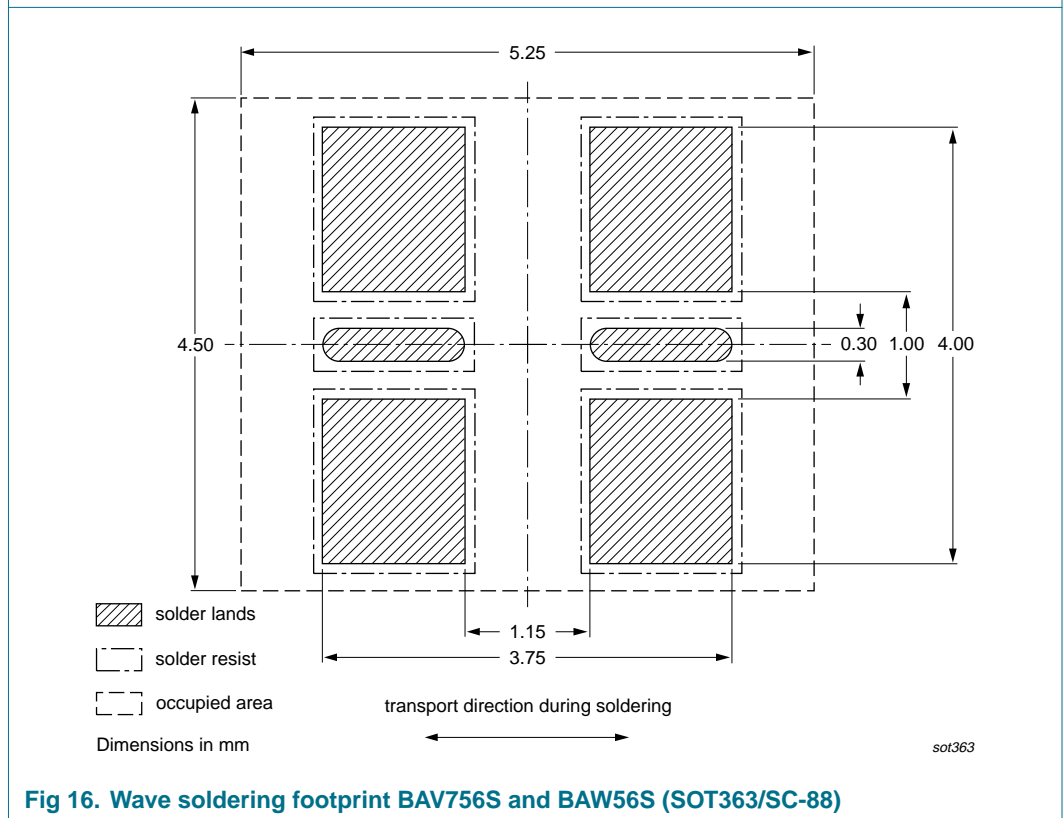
Wave soldering footprint BAV756S and BAW56S (SOT363/SC-88)
